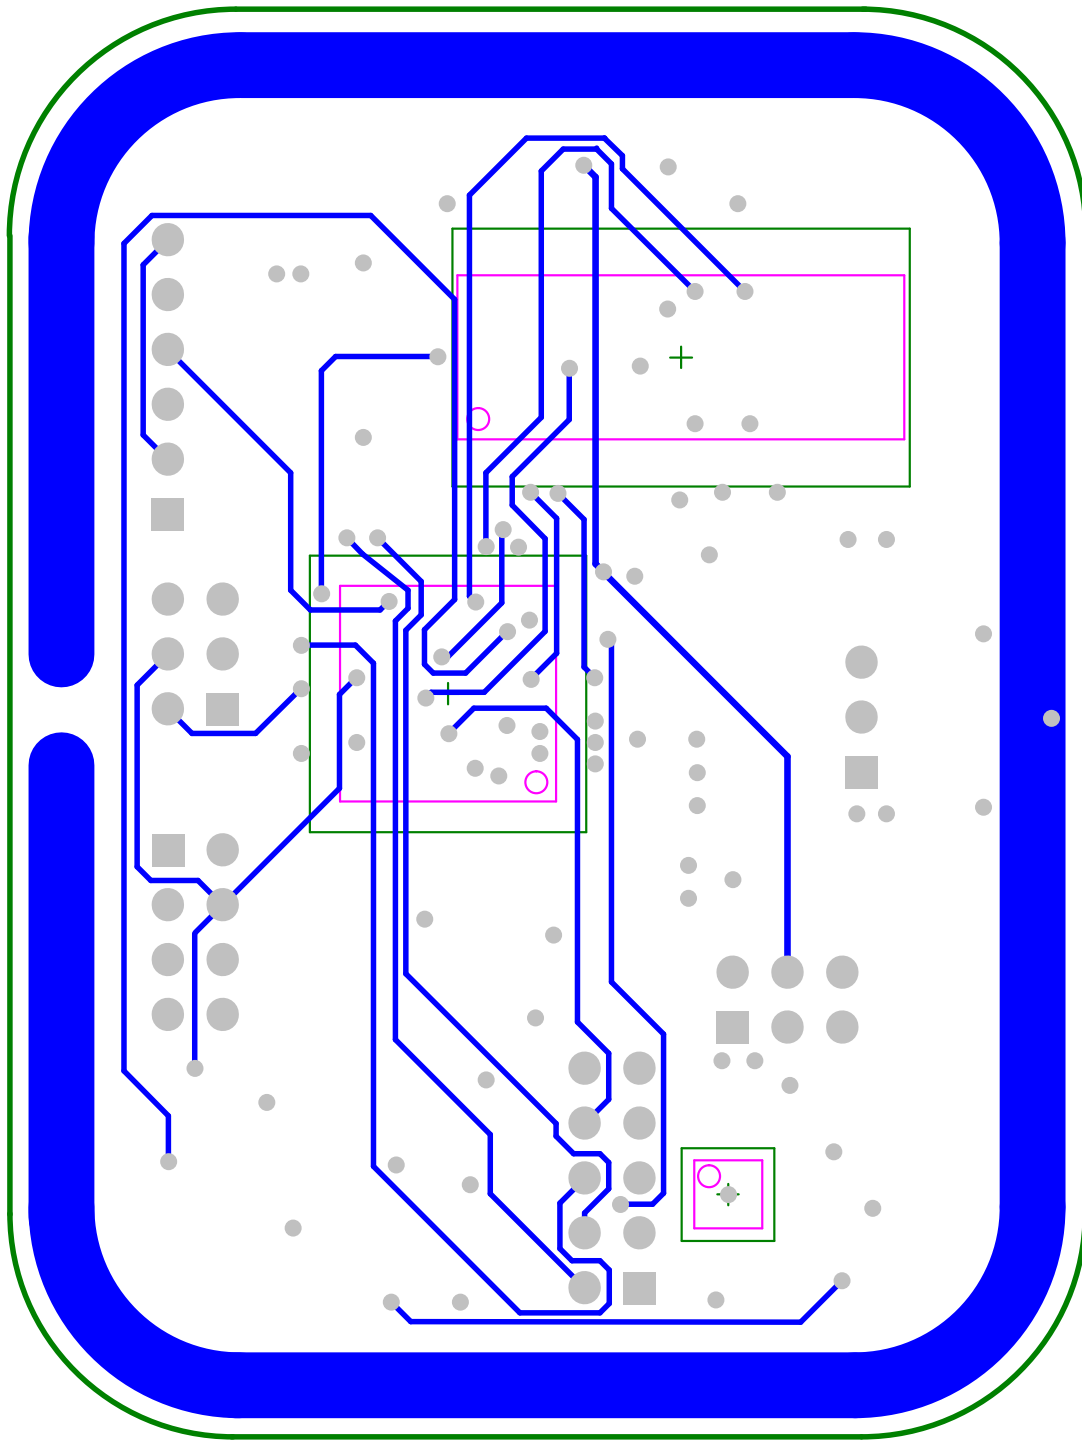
PCB Layout Page 4 of 4: Bottom Layer
